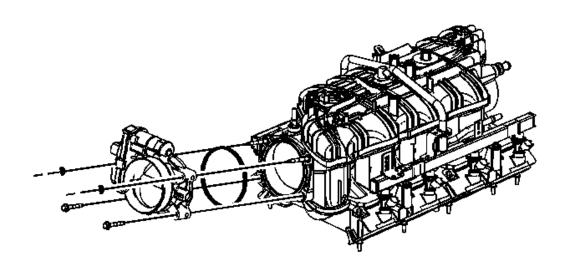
View Of Throttle Body, Gasket & Bolts/Nuts Courtesy of GENERAL MOTORS CORP.
